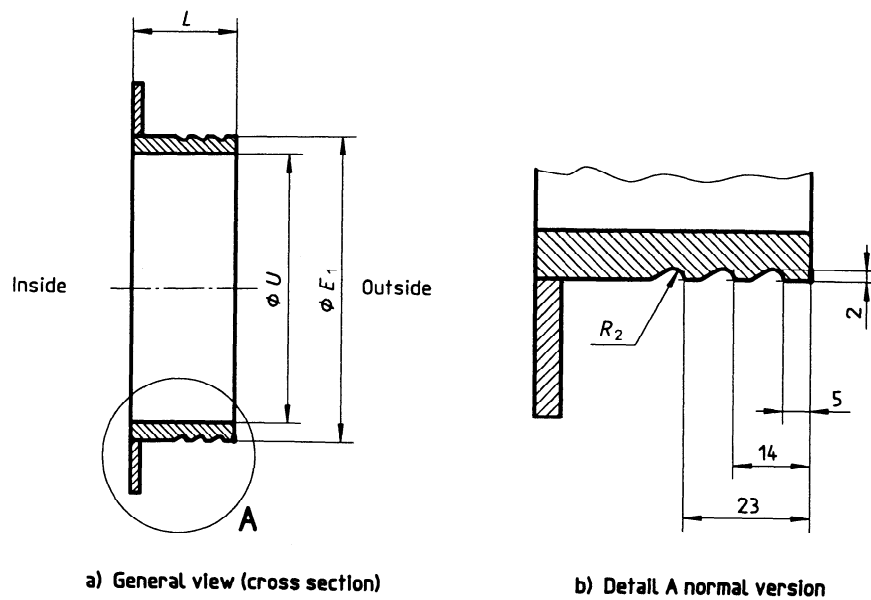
Example and dimensions of bonded or welded glove/bag ports having three external grooves
